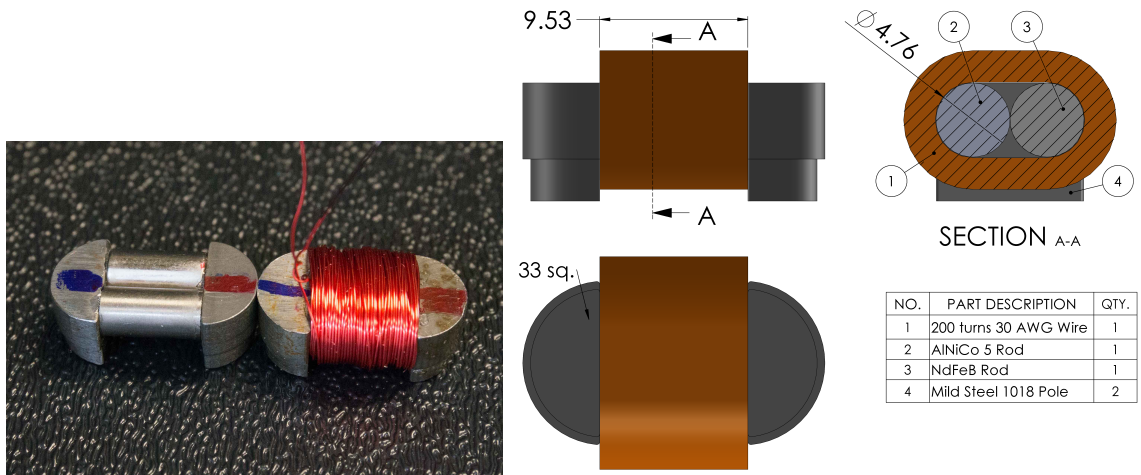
Left: EP magnets, before and after winding. Right: Technical drawing of EP magnet, dimensions in millimeters.
